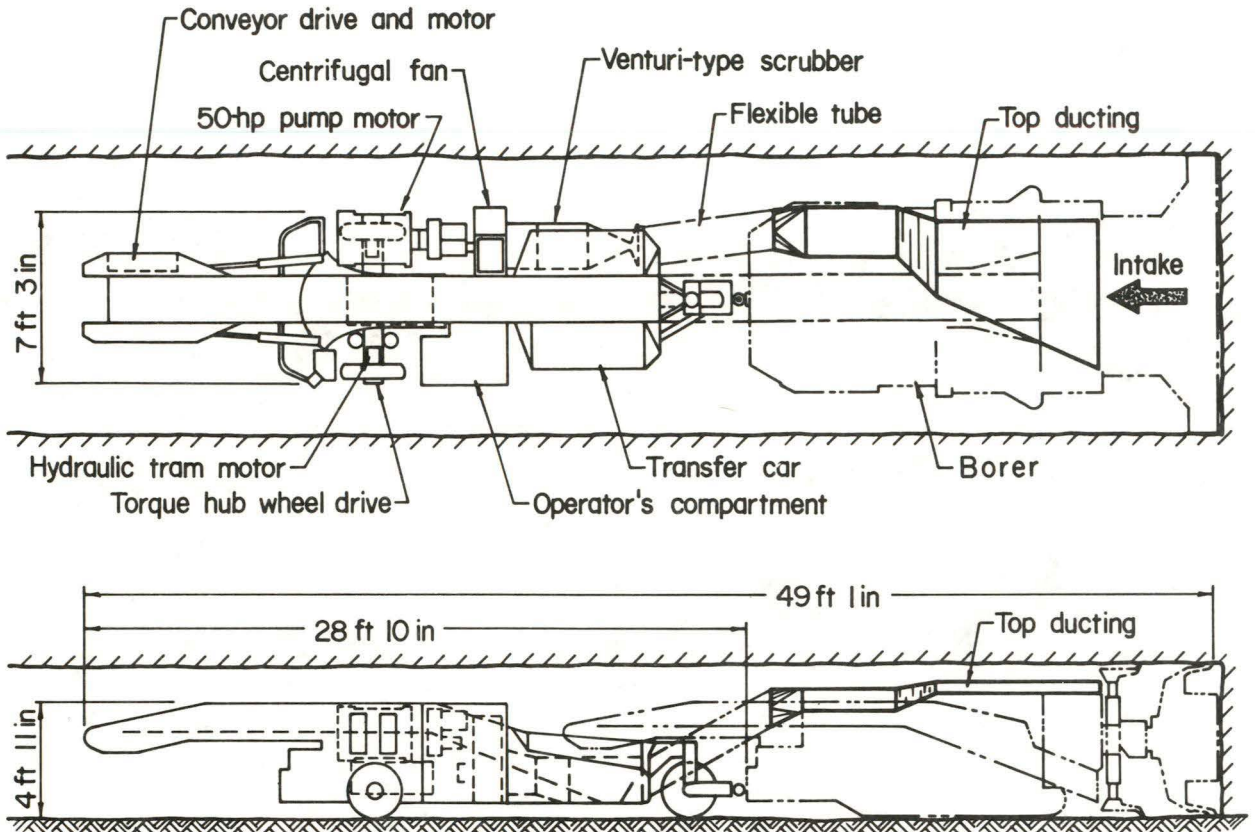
Transfer car with top ducting. Illustration shows motor and drive (left) and ducting on top of twin borer-type miner (right).
